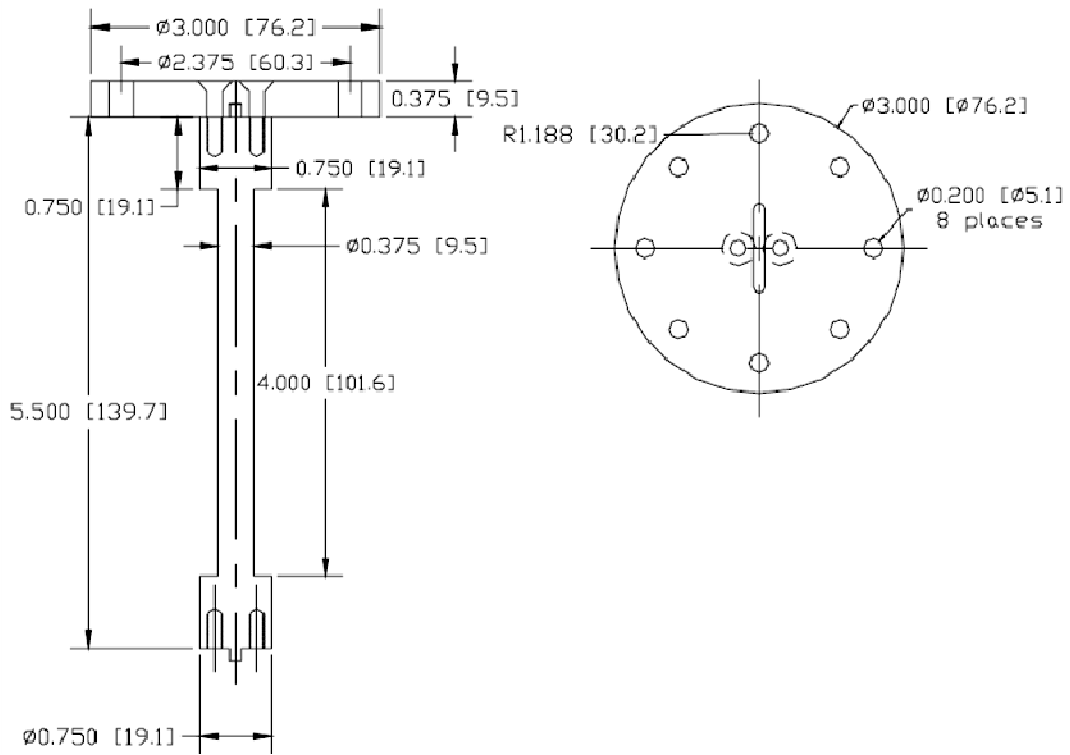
Calibration specimen geometry. Units in inches (millimeters)
